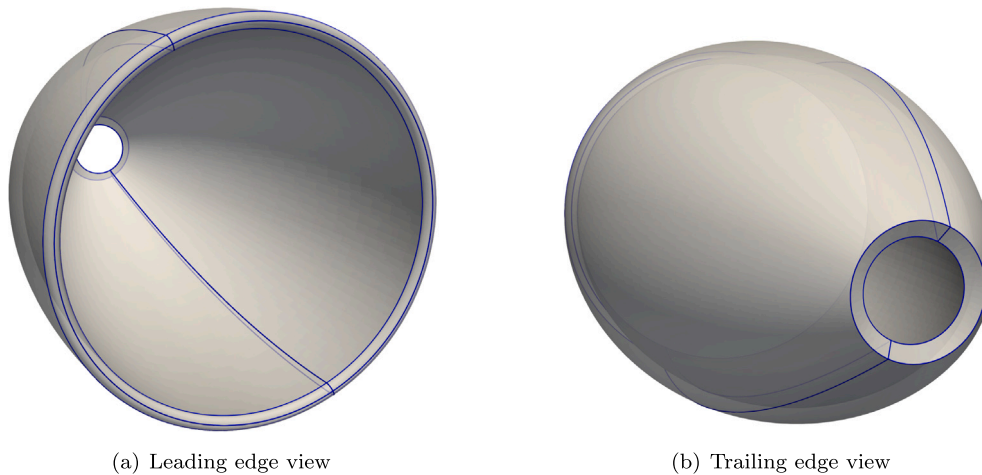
CAD geometry of the hollow fairing for a turbine engine.
